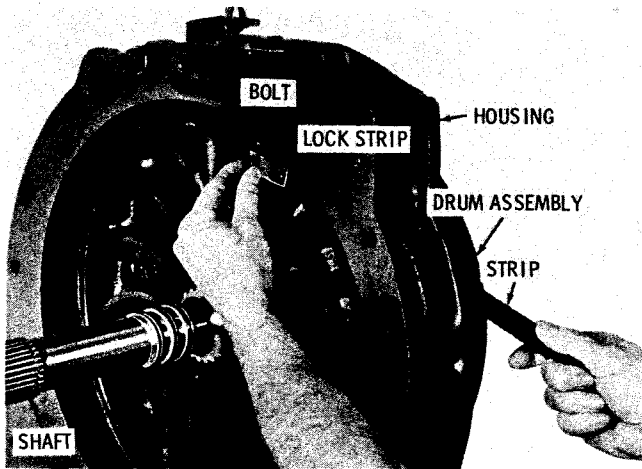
Installing second pitot tube bolt (CBT, CLBT, VCLBT)
